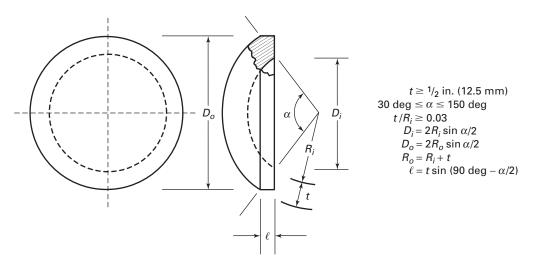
Standard Window Geometries – Part 2
